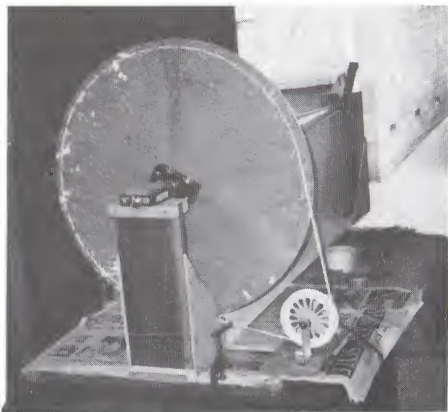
The belt drive on the end of the mould; also showing the bicycle pedal bearing on the mould frame.
